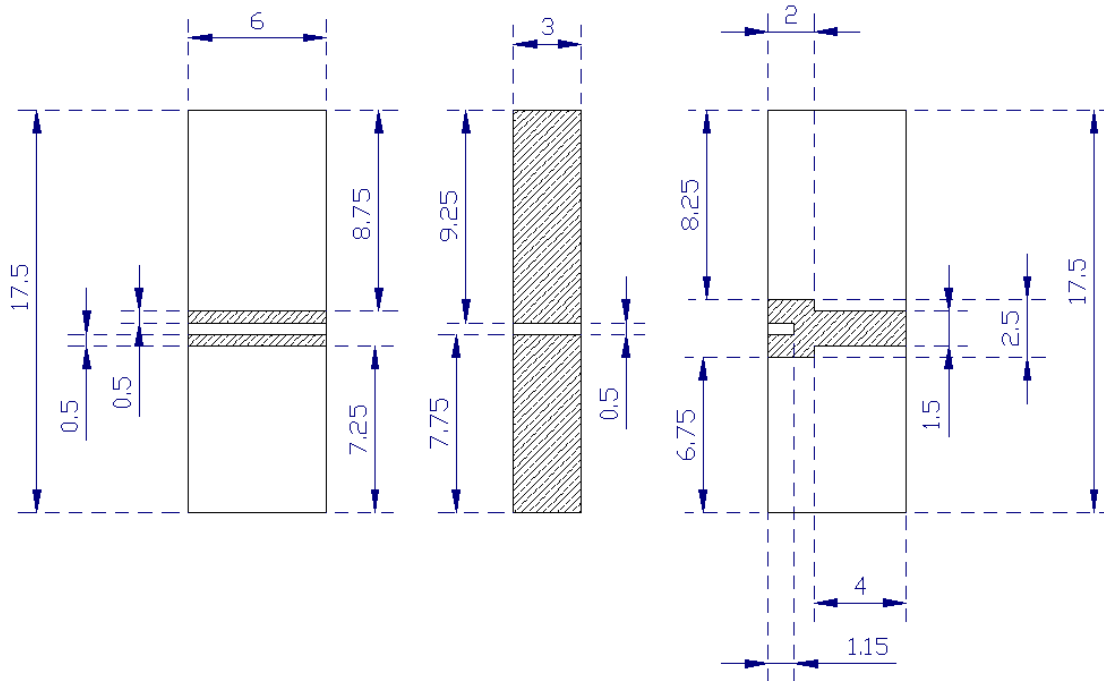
Main dimensions of final Dual-PIFA design (all dimensions in mm)
